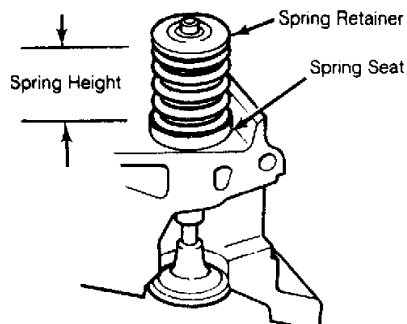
Measuring Valve Spring Installed Height - Typical
